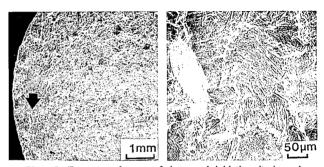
Fracture surface near fatigue crack initiation site (arrow) (double shot-peened specimen)
